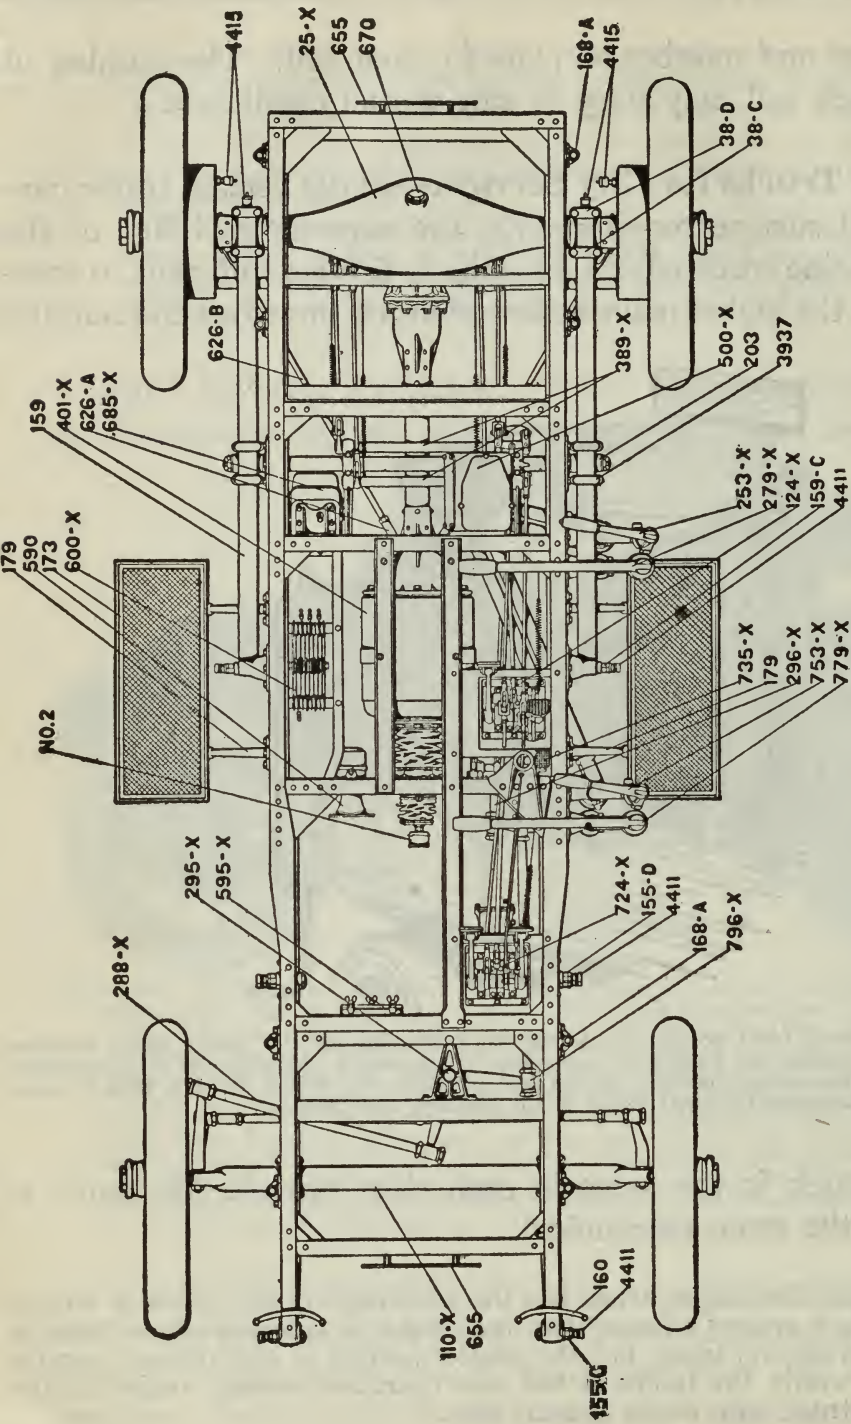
Plan view of Baker electric chassis. The parts are: 25-X, rear axle; 38-C, rear spring yoke front; 38-D, rear spring yoke rear; 110-X, front axle; 124-X, front levers, rear; 155-C, front spring bolt, front; 155-D, front spring bolt, rear; 159, rear spring; 159-C, rear spring bracket; 160, head lamp bracket; 168-A, fender bracket; 173, step pad; 179, step bracket; 203, rear spring seat, center; 253-X, rear control mast; 279-X, steering mast, rear; 288-X, lower steering rod, bell crank to spindle; 295-X, bell crank; 296-X, lower steering rod, mast to mast; 389-X, brake shaft; 401-X, motor; 500-X, controller; 590, horn; 595-X, fuse box; 600-X, resistance; 626-A, brace rod clevis; 626-B, brace rod; 655, license bracket; 670, oil inlet; 685-X, contactor; 724-X, foot levers, front; 735-X, interlock; 753-X, front control mast; 779-X, steering mast, front; 796-X, lower steering rod, mast to bell crank; 3,937, rear spring clip; 4,411, 4,415, No. 2 grease cups.
